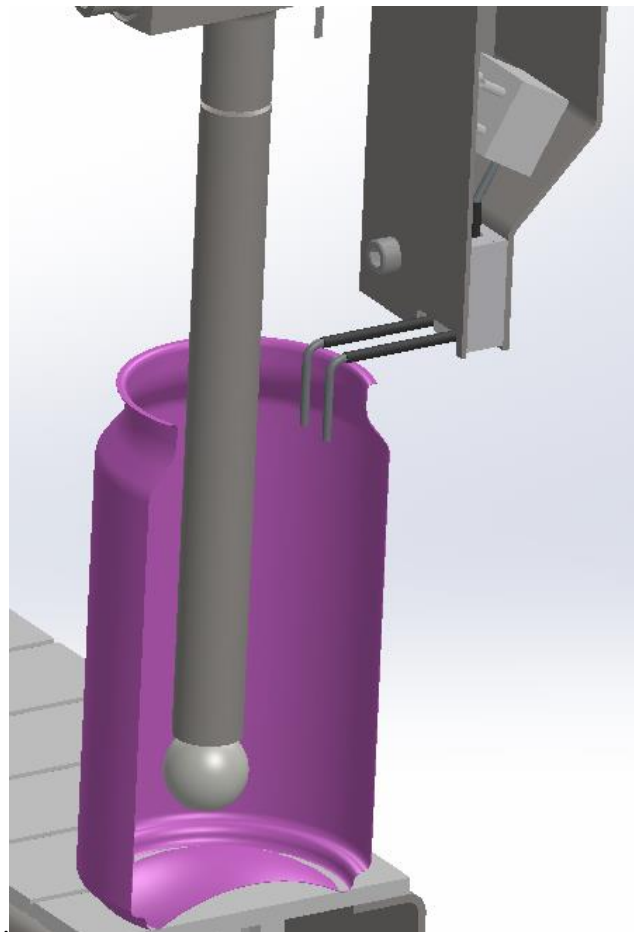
Filler Nozzle and Probe Assembly Cross-Section
